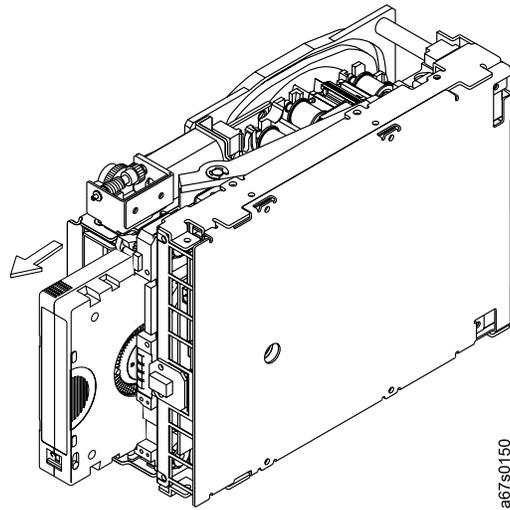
Rotating the loader motor gear until the cartridge ejects
